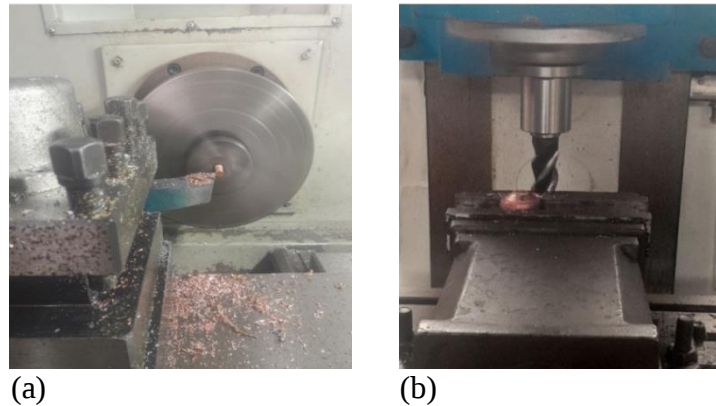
Machining of casted sample on a (a) lathe machine and (b) milling machine.
